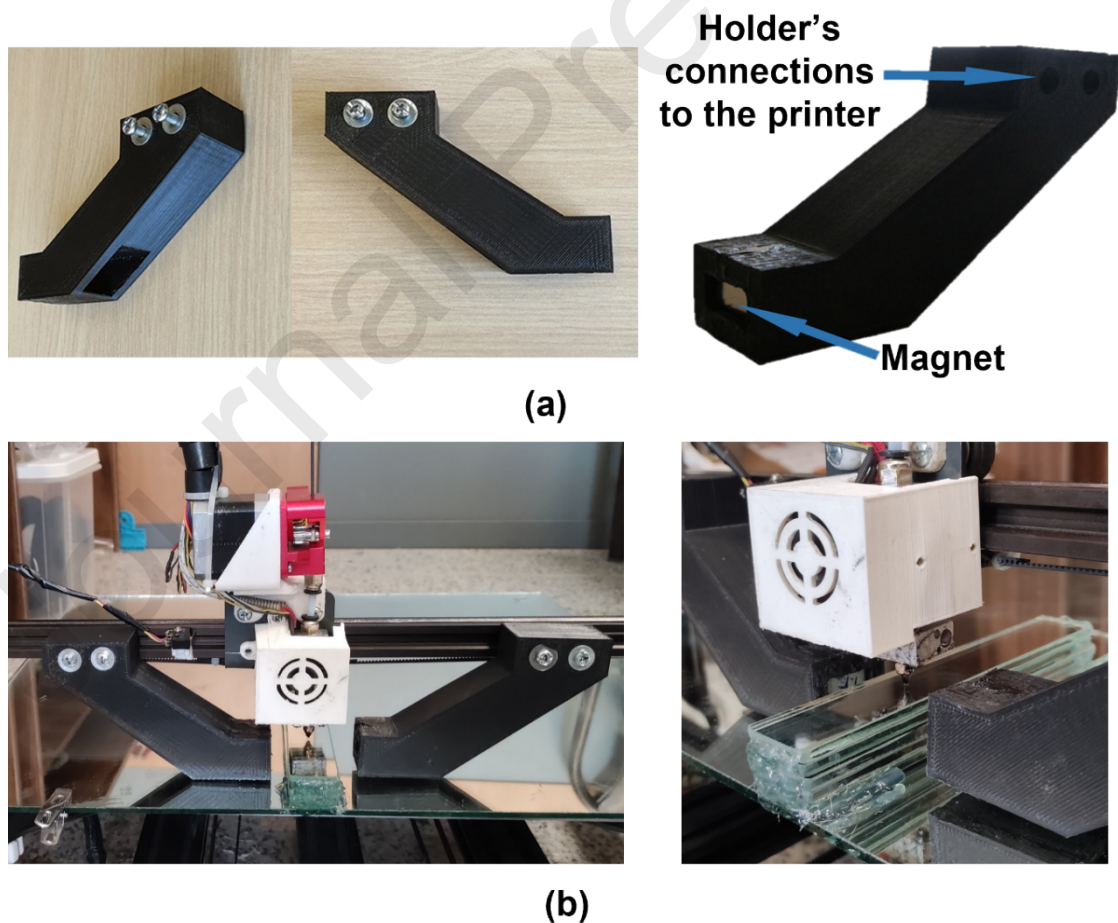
(a) Built-in magnet holder for mounting on the printer. (b) The personalized part of the printer for printing samples with magnets around.
